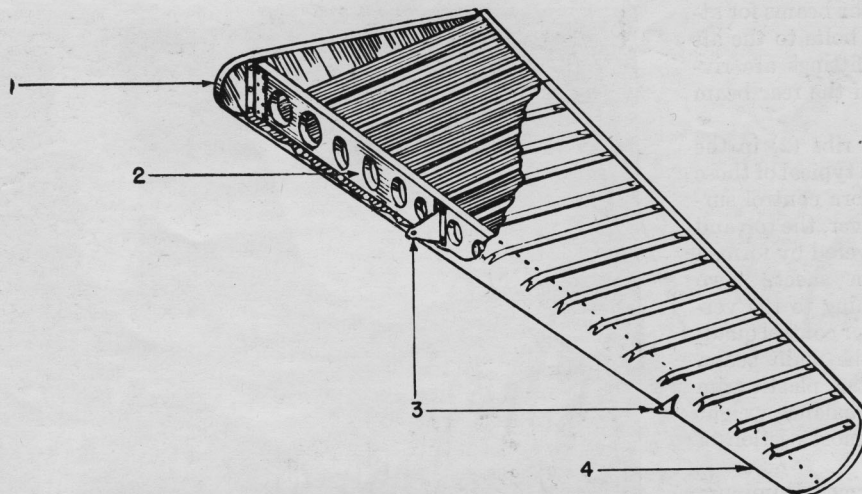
The simple make-up features of the elevator structure are (1) inboard end rib, (2) spar, (3) extruded hinge fitting, (4) single-piece wrap-around skin joined at the T.E. and having an integral skin tip to eliminate the end rib.
